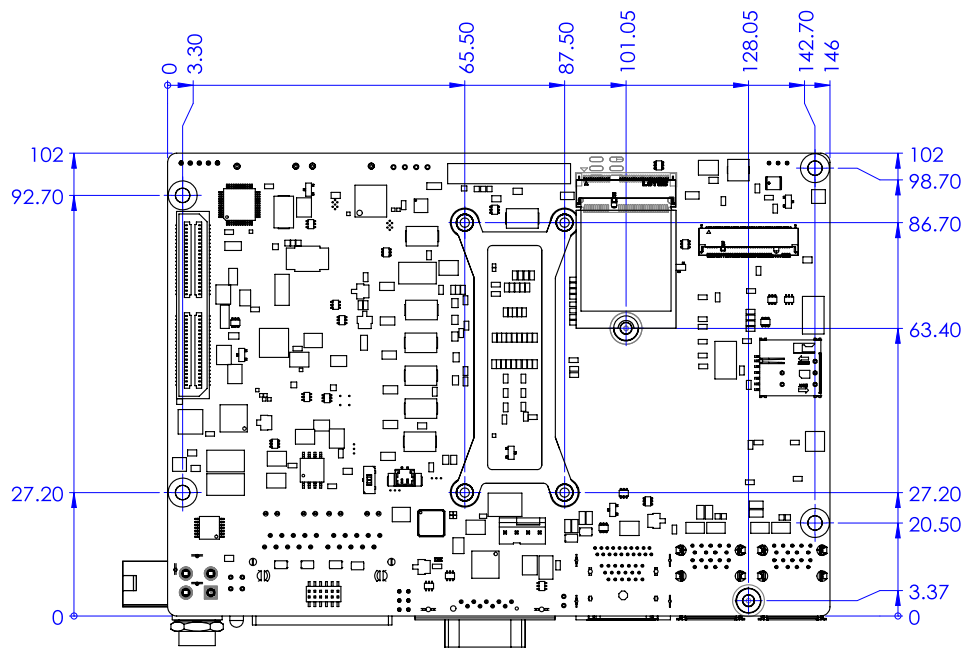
MIO-5393 Mechanical Drawing (Bottom Side)
